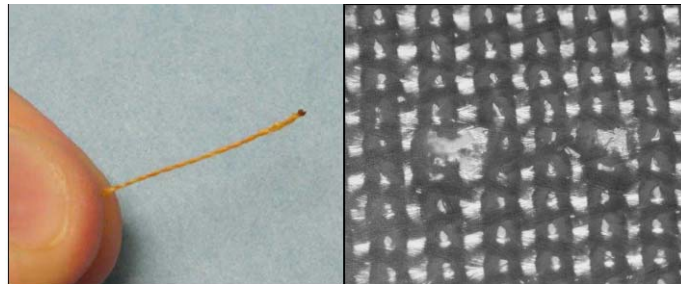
a) Thread breakage due to needle heat b) Needle holes caused by needle heat²
